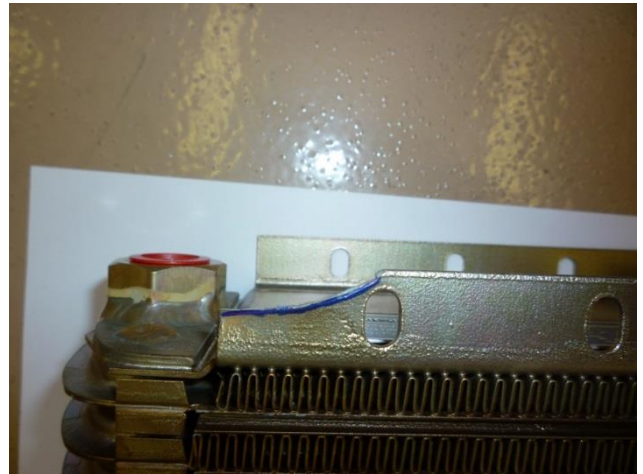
shows the modification to the forward, upper, inboard corner of the oil cooler to clear the engine mount tube. Again, use only tin snips to make this modification.
